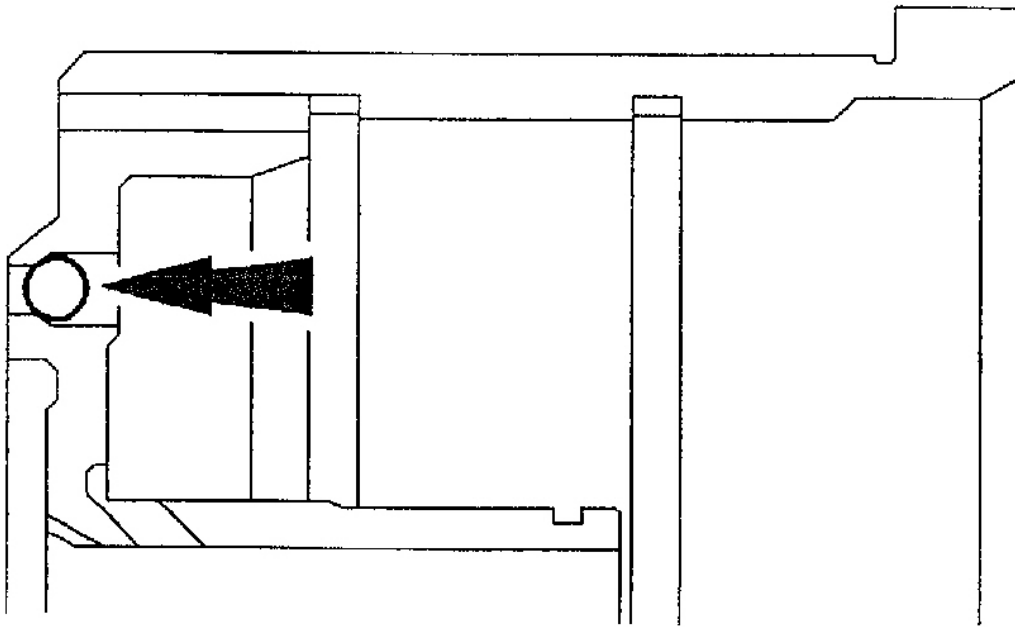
Installing Coast Clutch Piston Inner & Outer Seals
